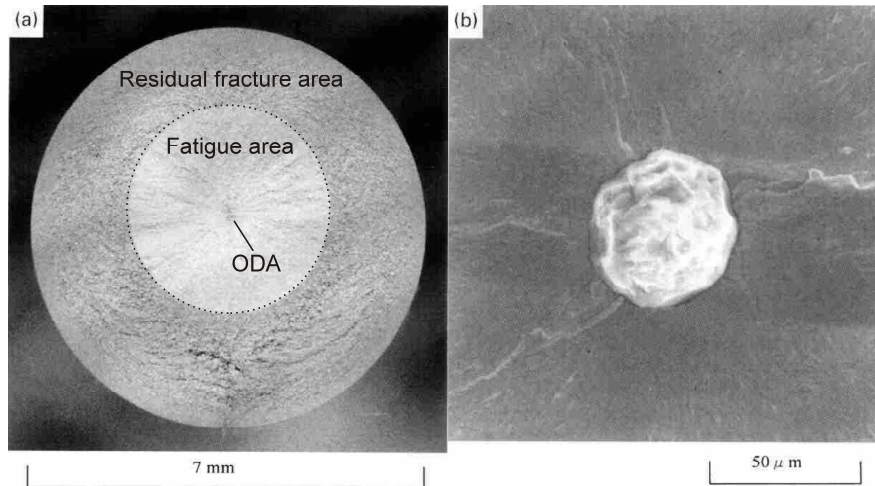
Left: typical fish eye appearance of an internal fatigue fracture. Right: Internal non-metallic inclusion inside the ODA.
